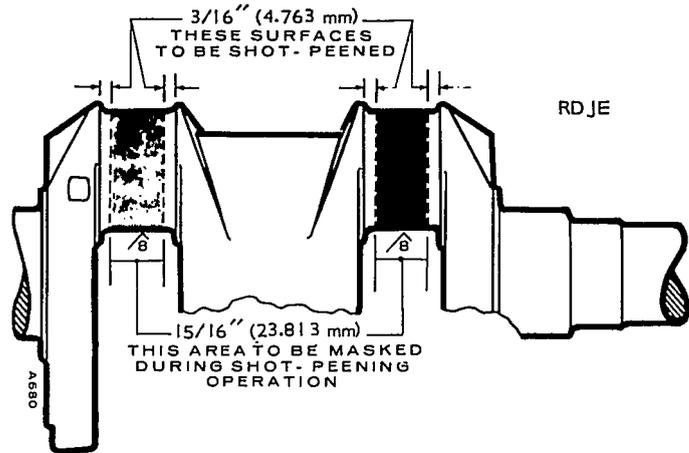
SHOT-PEENING THE CRANKSHAFT
